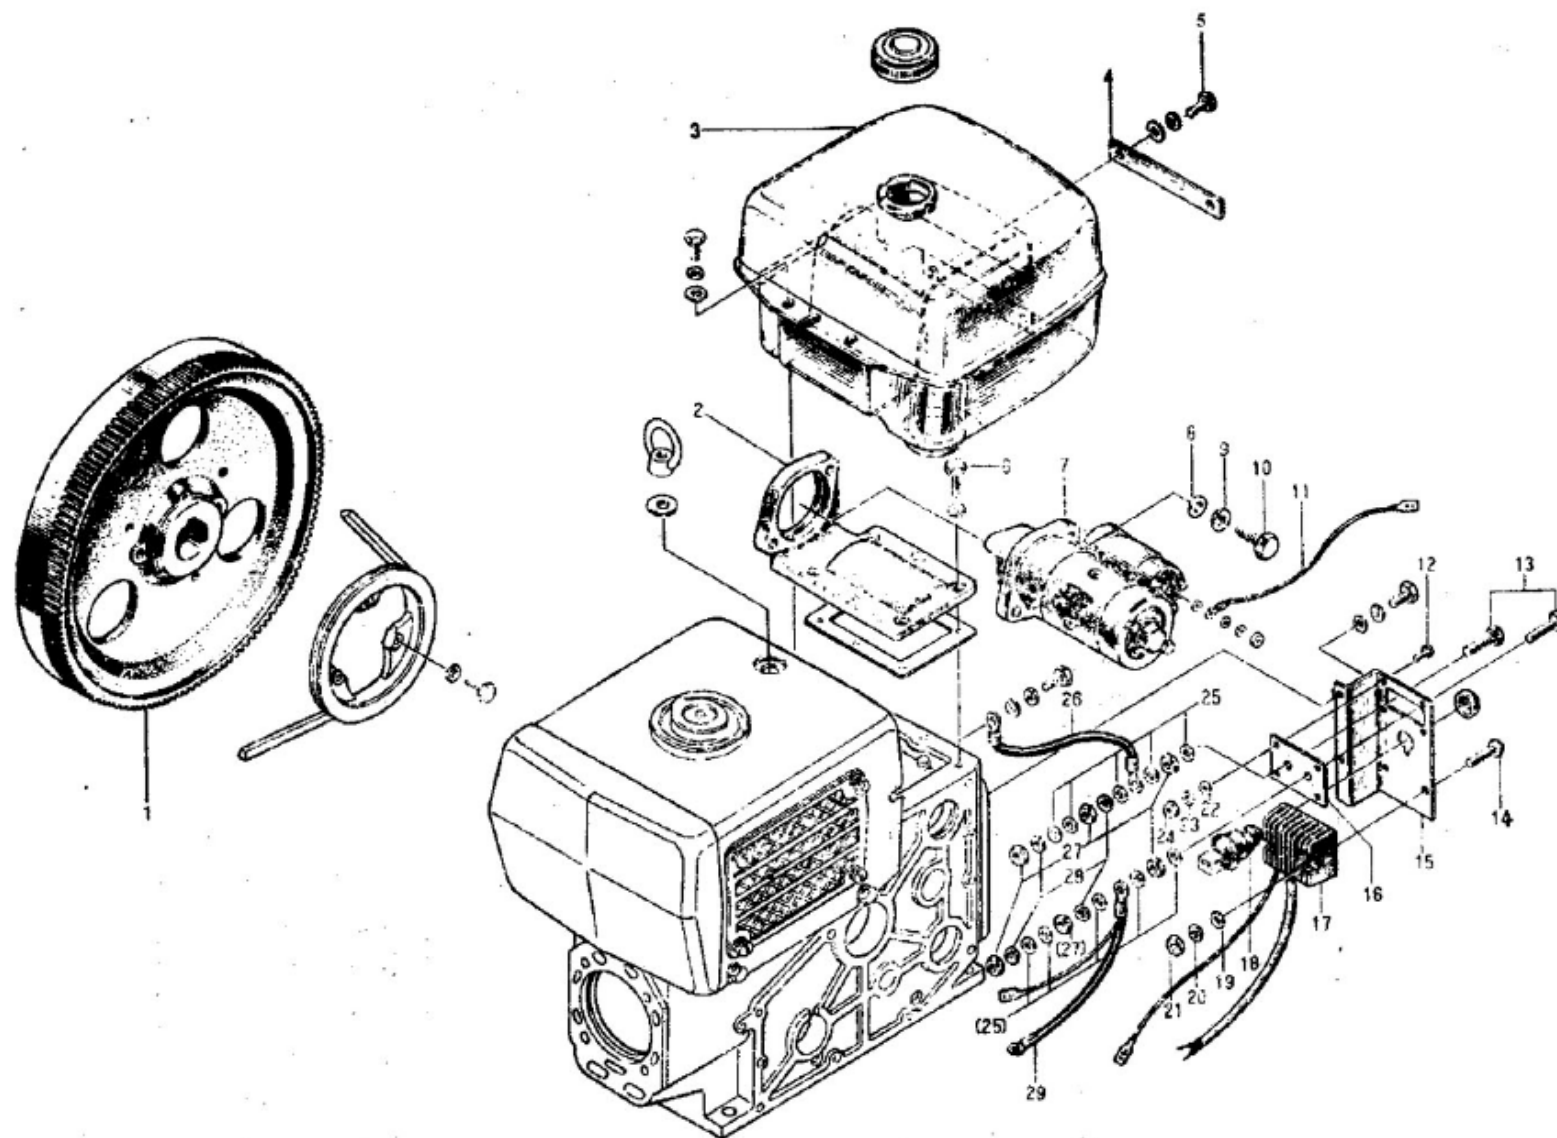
Special Parts for Model S195M/S1100M Diesel Engine
